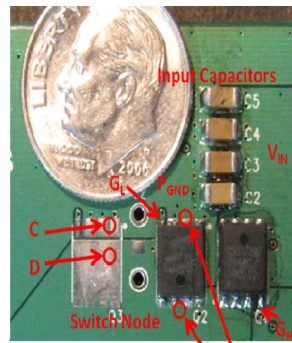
Optimized Placement and PCB Layout of Power Stage Components
